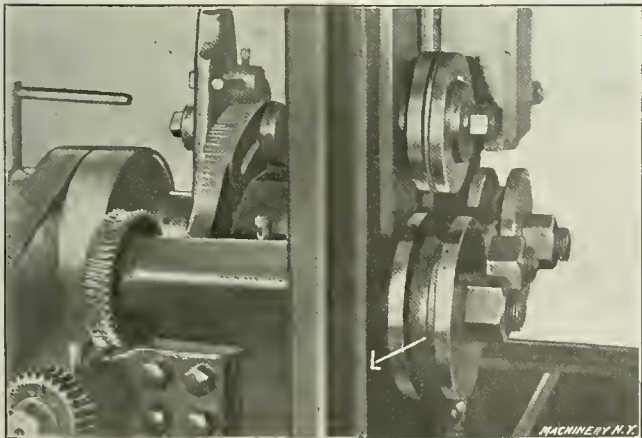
Detail View showing Feeding Guide-rolls of Spline Miller
